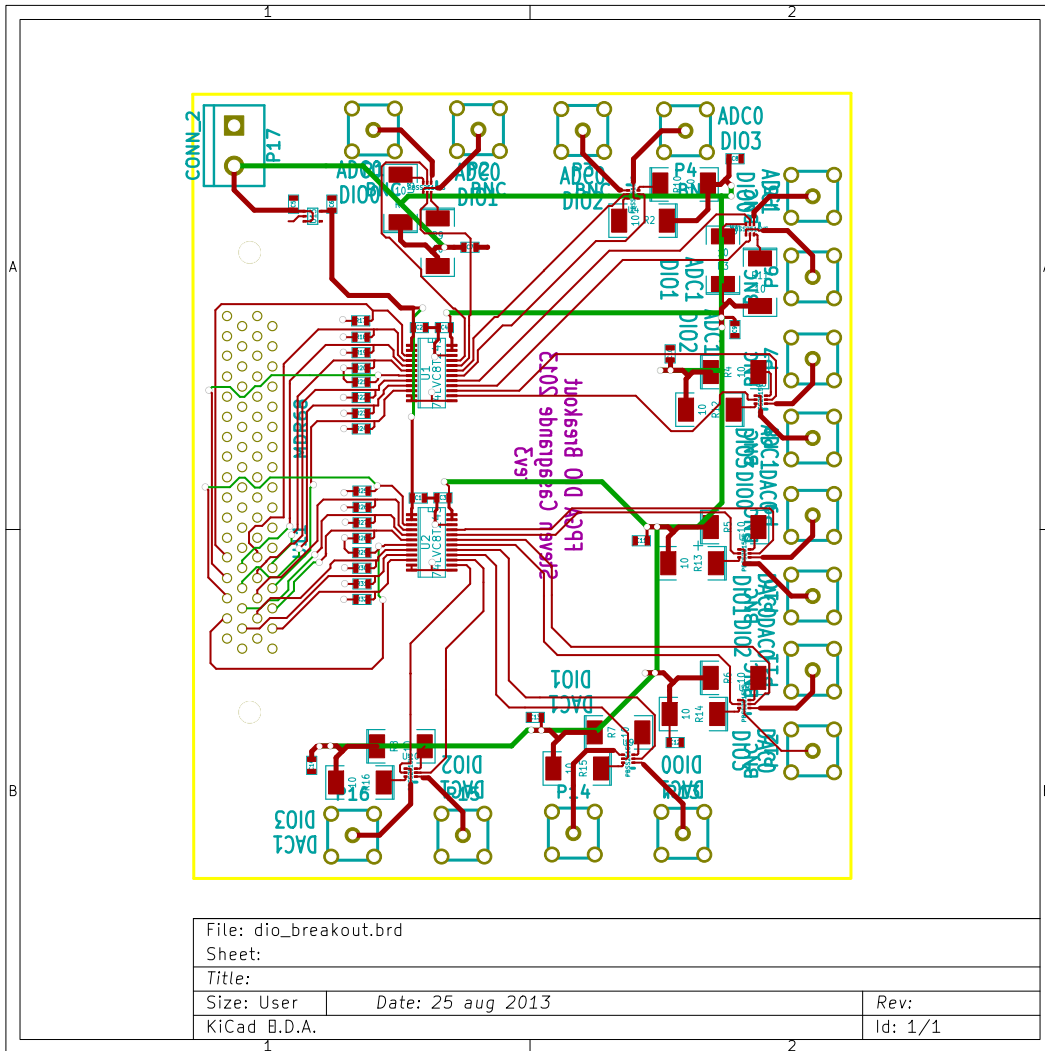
PCB layout for X6-1000M DIO breakout board made using KiCAD. This diagram omits the filled copper zones on the front and back for ease of viewing.
